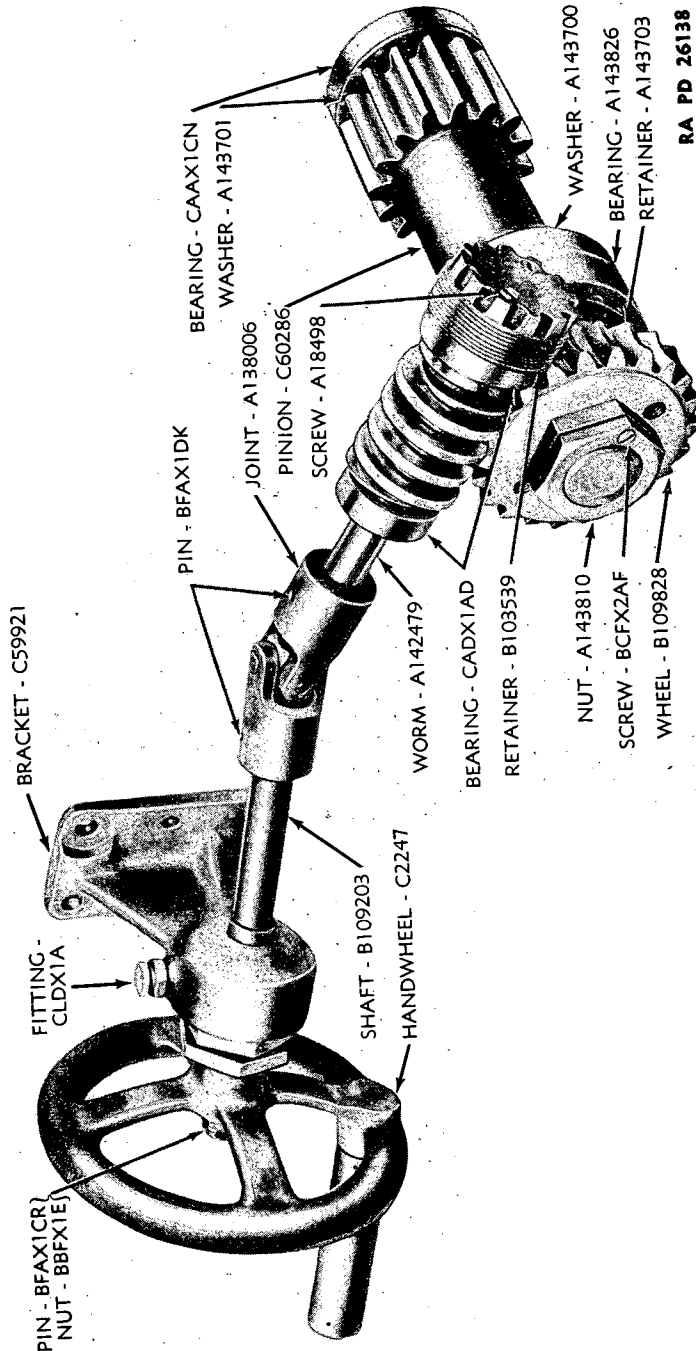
75-mm Howitzer Carriage M3A3—Elevating Mechanism Arrangement
